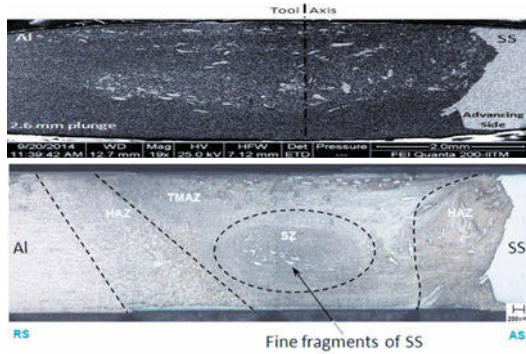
Macrographs of a weld cross section showing bonding at the SS/Al interface.
